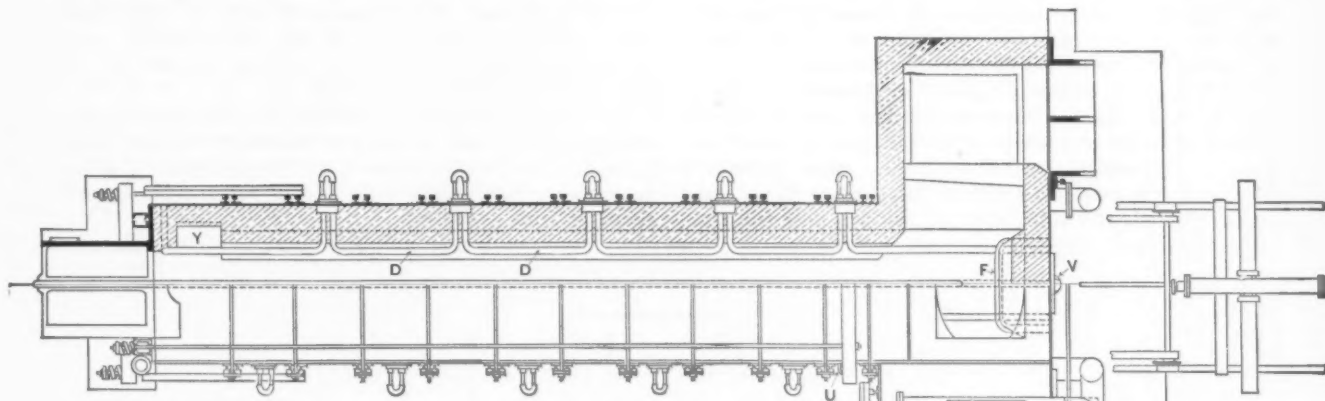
Sectional Plan of Vertical Heating Furnace.
